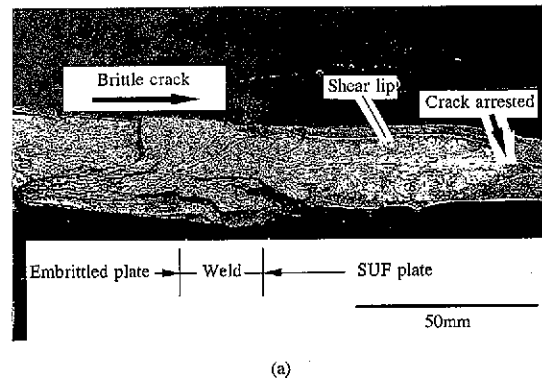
Fracture of Type I ultra-wide duplex ESSO test specimen
